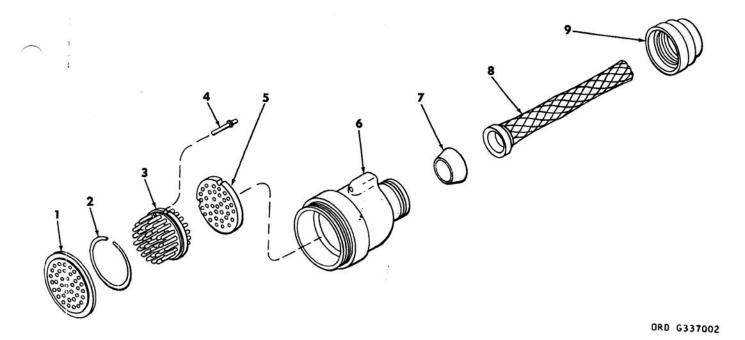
CABLE ASSEMBLY, POWER, ELECTRICAL /11067500 AND 11067544/ /SEE FIGURES 12 AND 15 FOR NEXT HIGHER ASSEMBLY/
